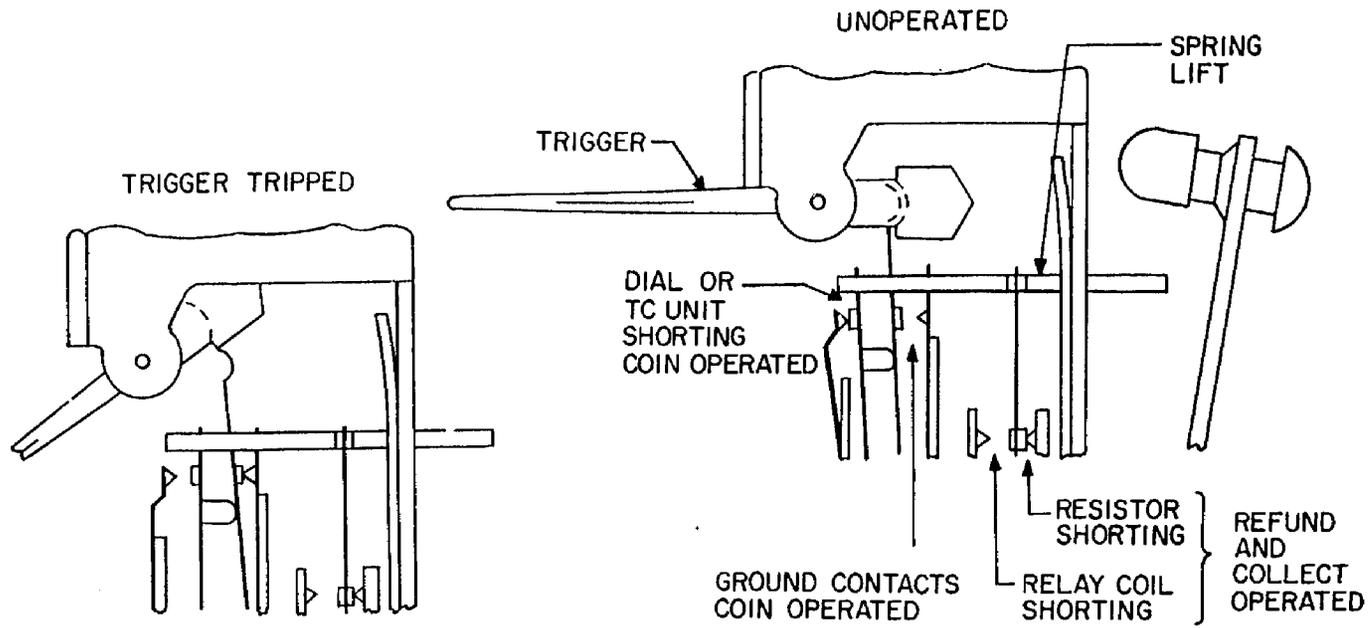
Coin Relay Contact Spring Assembly and Schematic.
